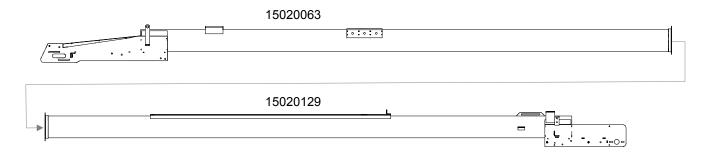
Conveyor Tube Layout for 1545 TD Model (Batco & Westfield)
